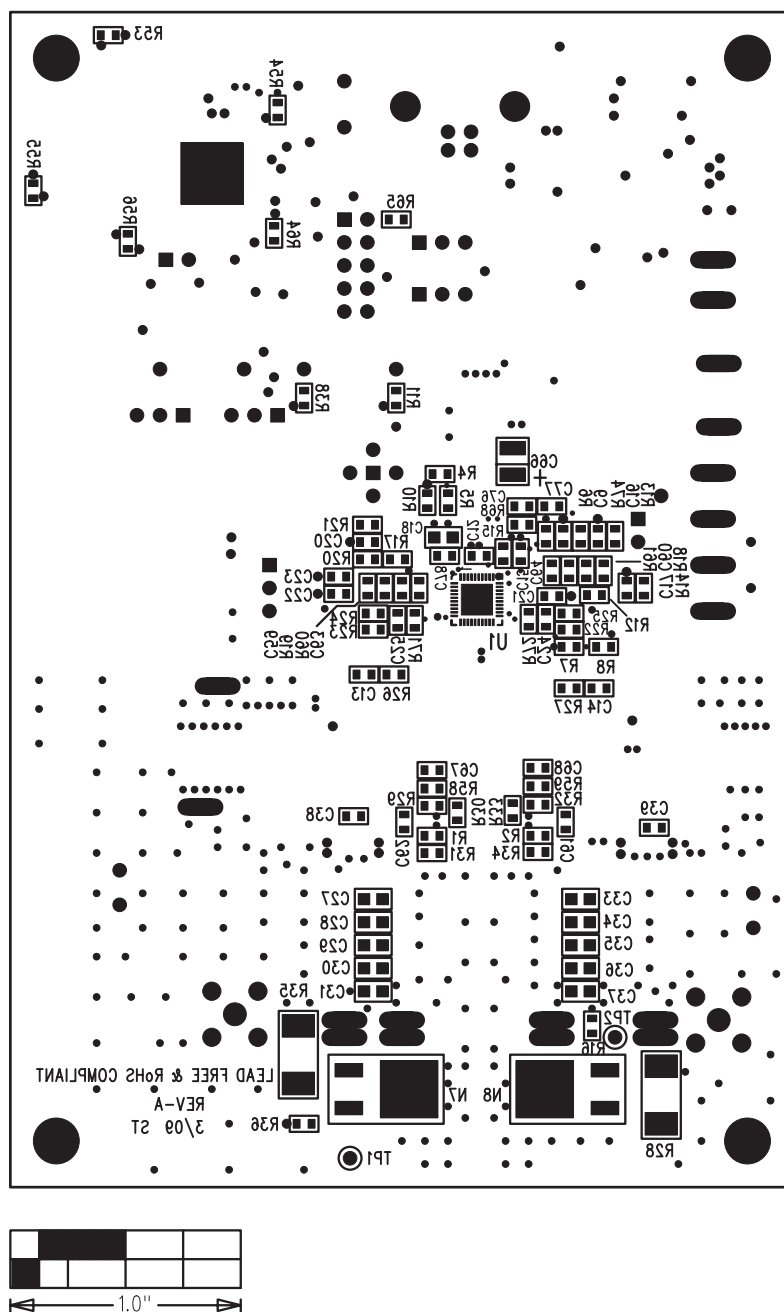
MAX17480 EV Kit Component Placement Guide—Solder Side
